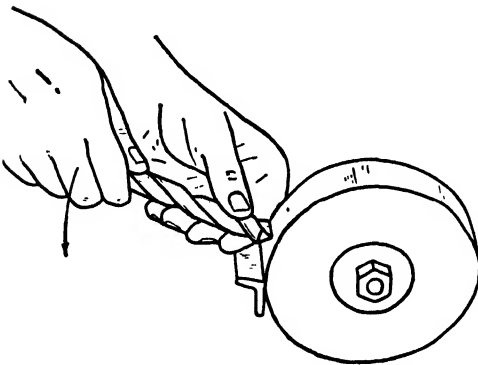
The end of the drill may be supported by the first finger of the left hand, which is placed on top of the work rest. Be careful not to let the finger touch the grinding wheel.
